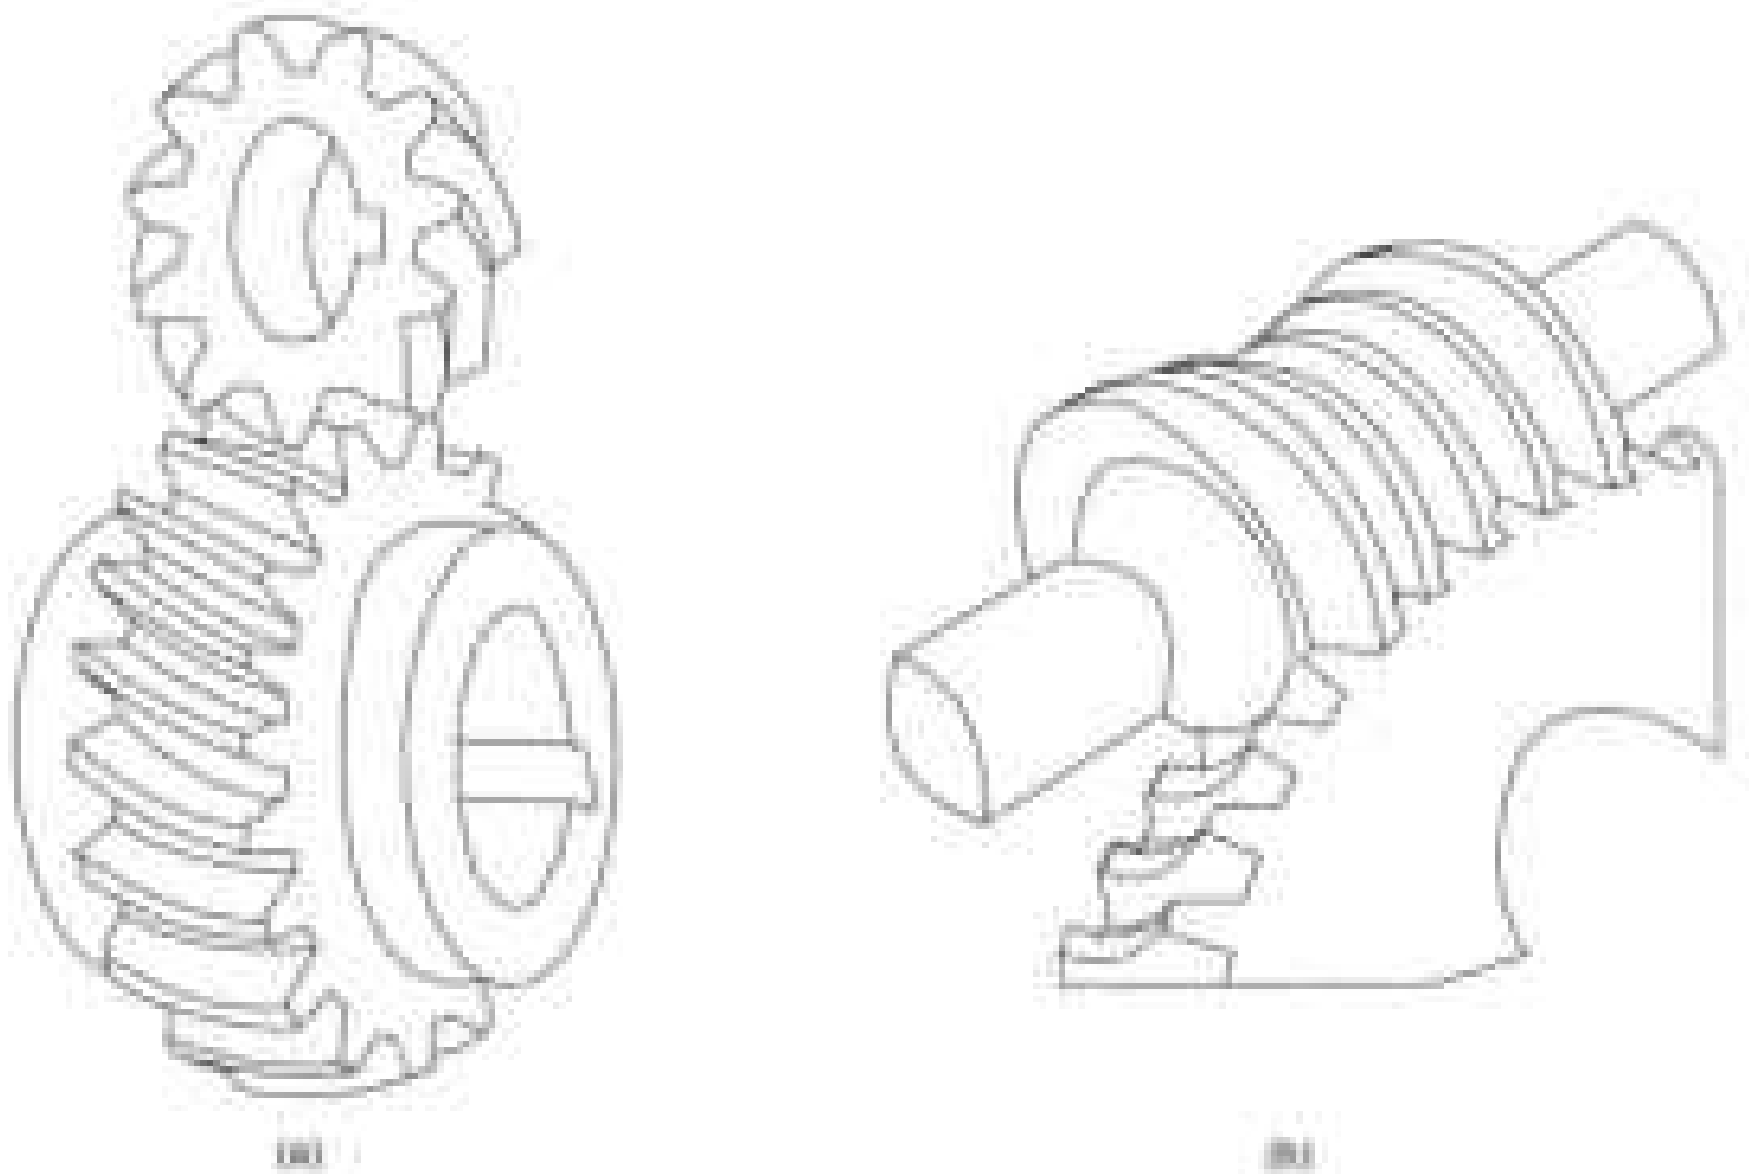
(a) Spiral gear pair (b) Worm-worm gear pair
